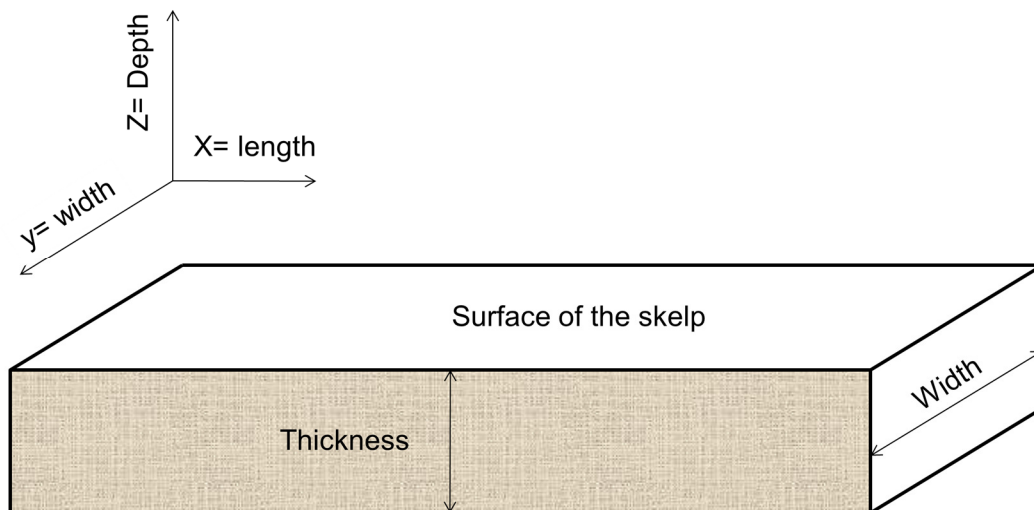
Dimensions of a typical steel strip on the run-out table
